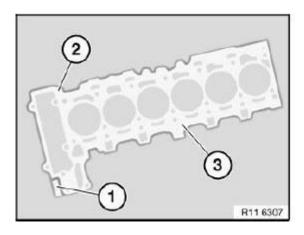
Identifying Cylinder Head Gasket Identification Mark With Rubber Coating Courtesy of BMW OF NORTH AMERICA, INC.
